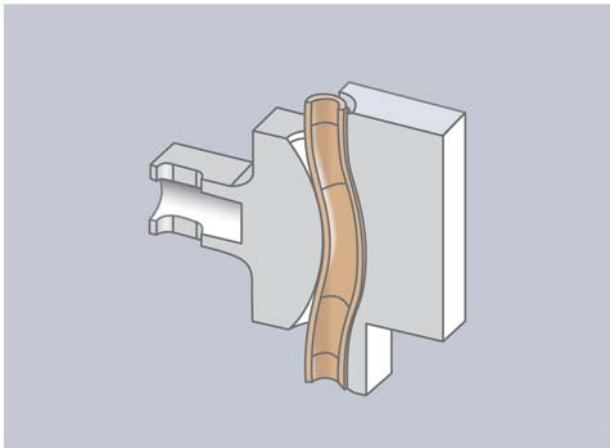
Example Bending on a Mandrel Using Mating Blocks (cross sectional view showing blocks and mock vessel)
